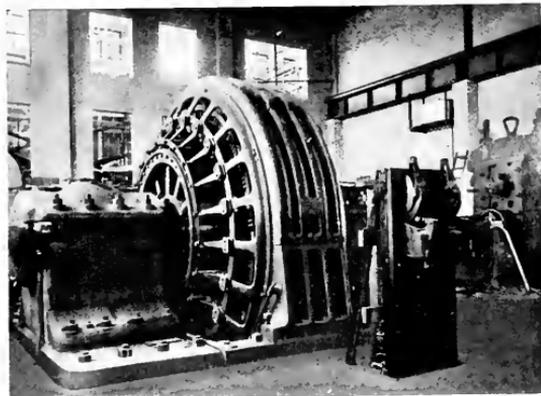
2500-h.p., 40 120-r.p.m. Motor driving 36-inch Reversing Blooming Mill, Ashland Iron Mining Company, Ashland, Ky.
